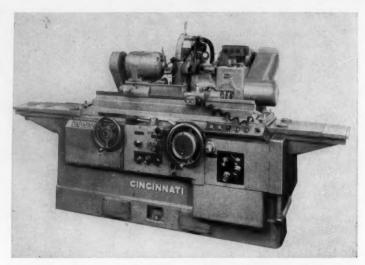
Cincinnati Filmatic plain grinding machine equipped for automatic push-button infeed and electric gage sizing
